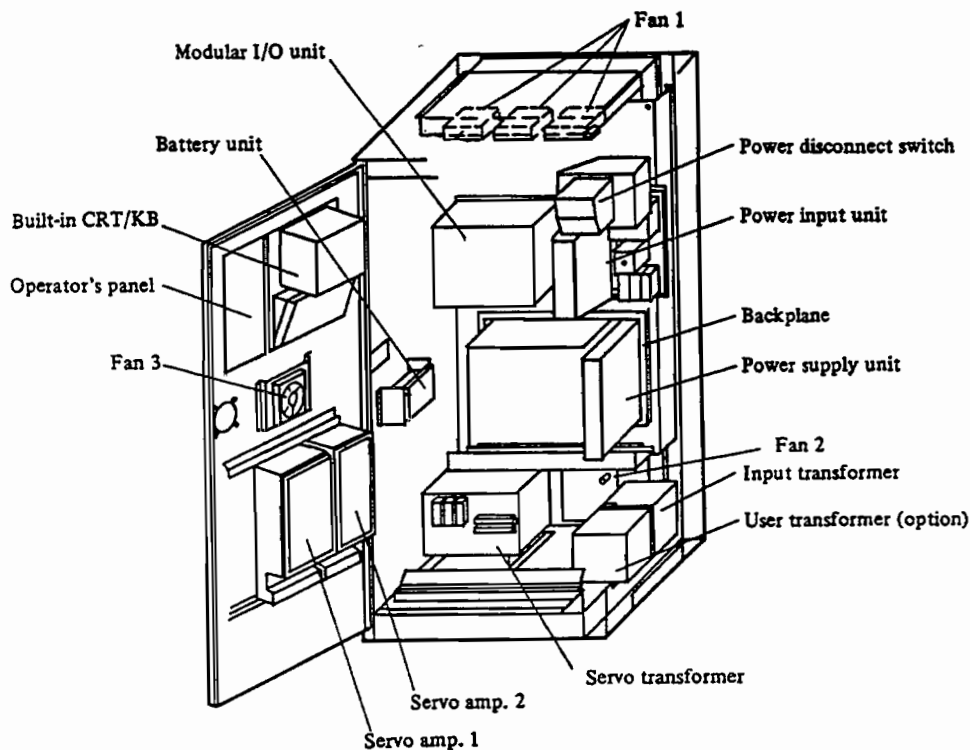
(b) Internal component location (S-10, large size cabinet)
